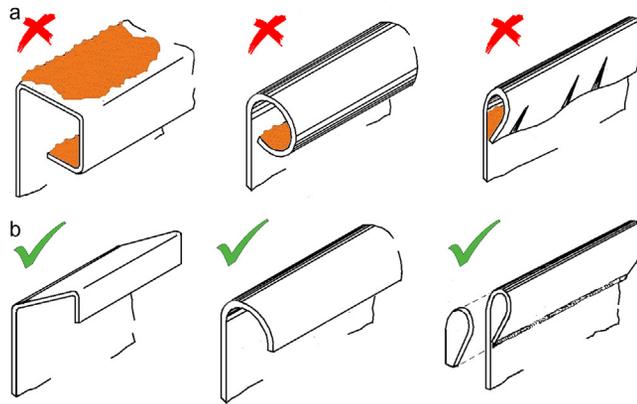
Top rims may impart rigidity to the construction. (a) However, a rim with an upper horizontal part provides a surface where debris may collect. When the rolled-over part of the rim is badly designed, it may provide a ledge where product debris can lodge. This soil can indirectly affect the product. (b) Open top rims must be rounded in a way that at one side the product drains back in the bulk of the product, while the more exterior part of the rim must allow drainage to the outside. Where preference is given to closed top rims, the top rim should be welded correctly to the wall over its full length. The weld must be flush and polished to provide a smooth surface and the rim must be totally closed. Any holes, therefore, must be sealed by welding or by fitting sealed caps (CFPRA, 1983).
